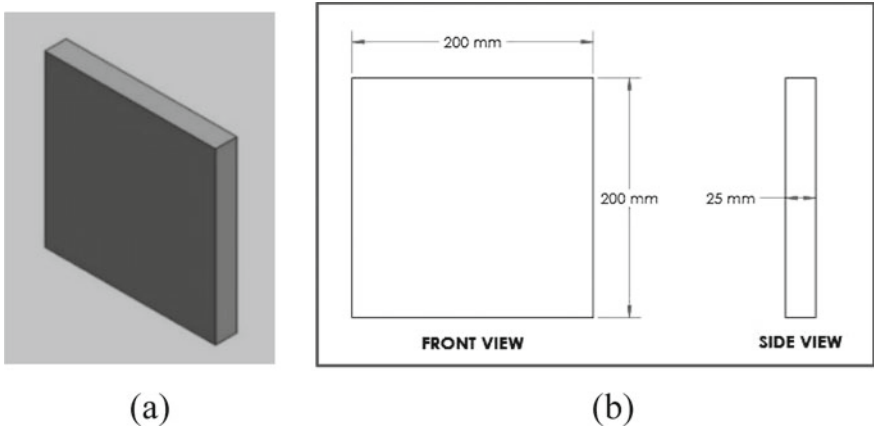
Geometry of plate model: (a) isometric view and (b) dimensional details
